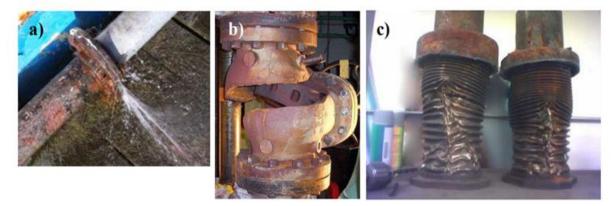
Effects of a water hammer: a) failure of a seal, b) destruction of the valve casing, c) collapsing of expansion joints [18]
